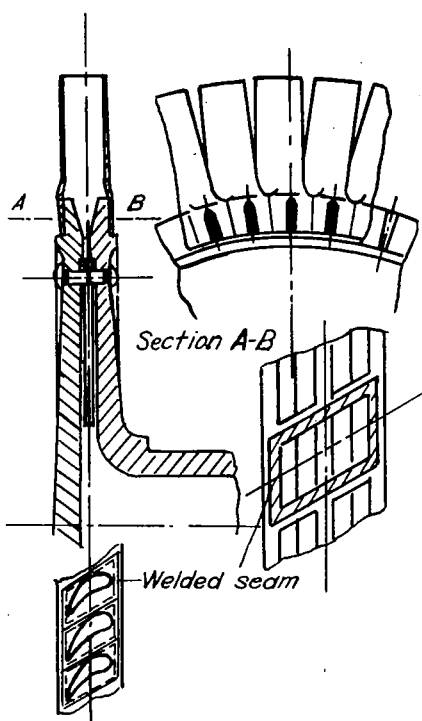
Box-root blade mounted on wheel from the outside and welded.
